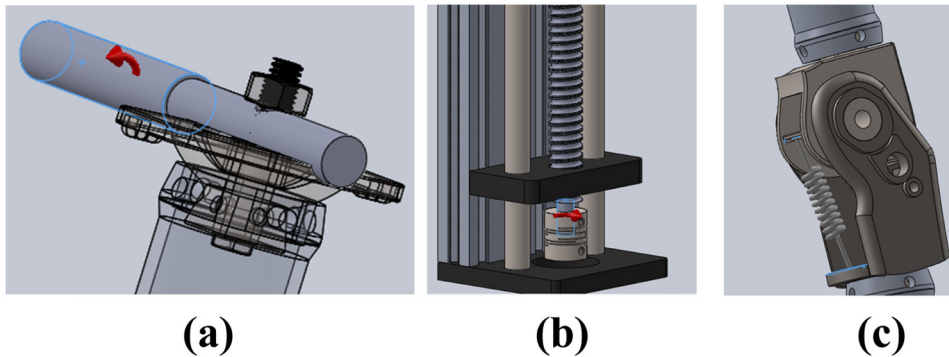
(a) Rotary motor for shaft rod, (b) rotary motor for ball-screw, and (c) axial spring force for knee joint.
